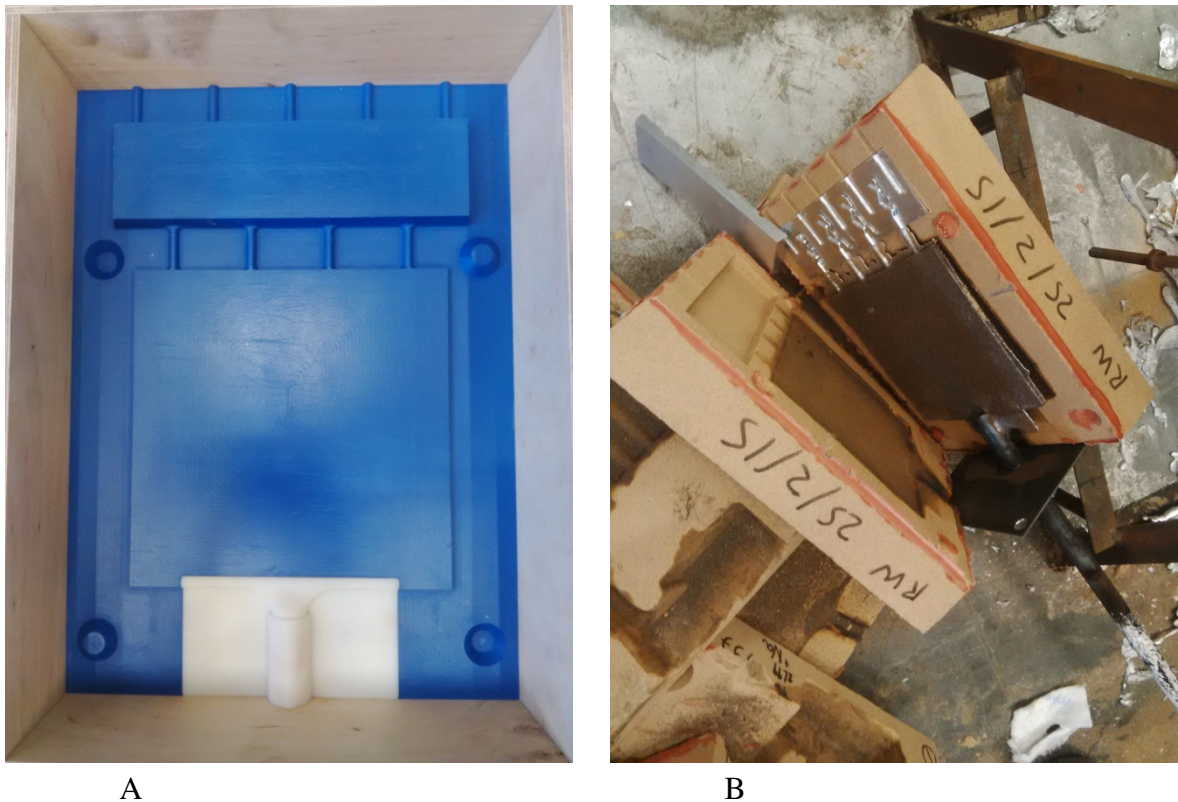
The pattern (A) and a preliminary casting (B) from the plate casting experiments.
